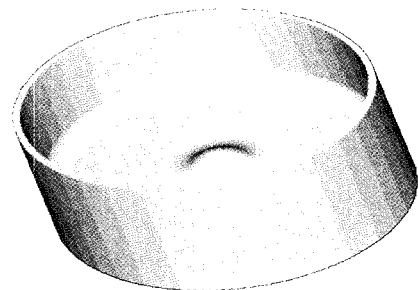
Final wheel shape obtained in the forging process of 6061 aluminum alloy
